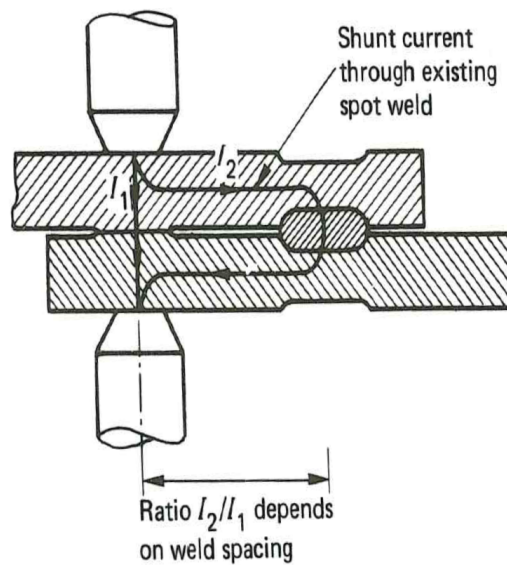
Shunt weld with current path. Taken from [14].
